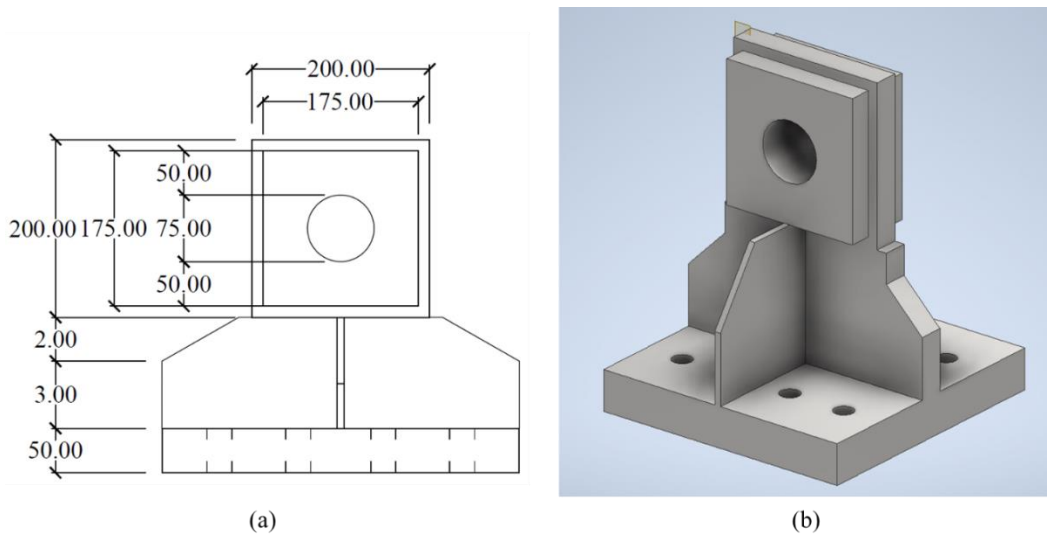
Detailed layout of the modified steel grip assemblies (a) dimensions of the modified upper and lower steel grip plates in millimeters, and (b) 3D render of the modified upper steel grip plate.
